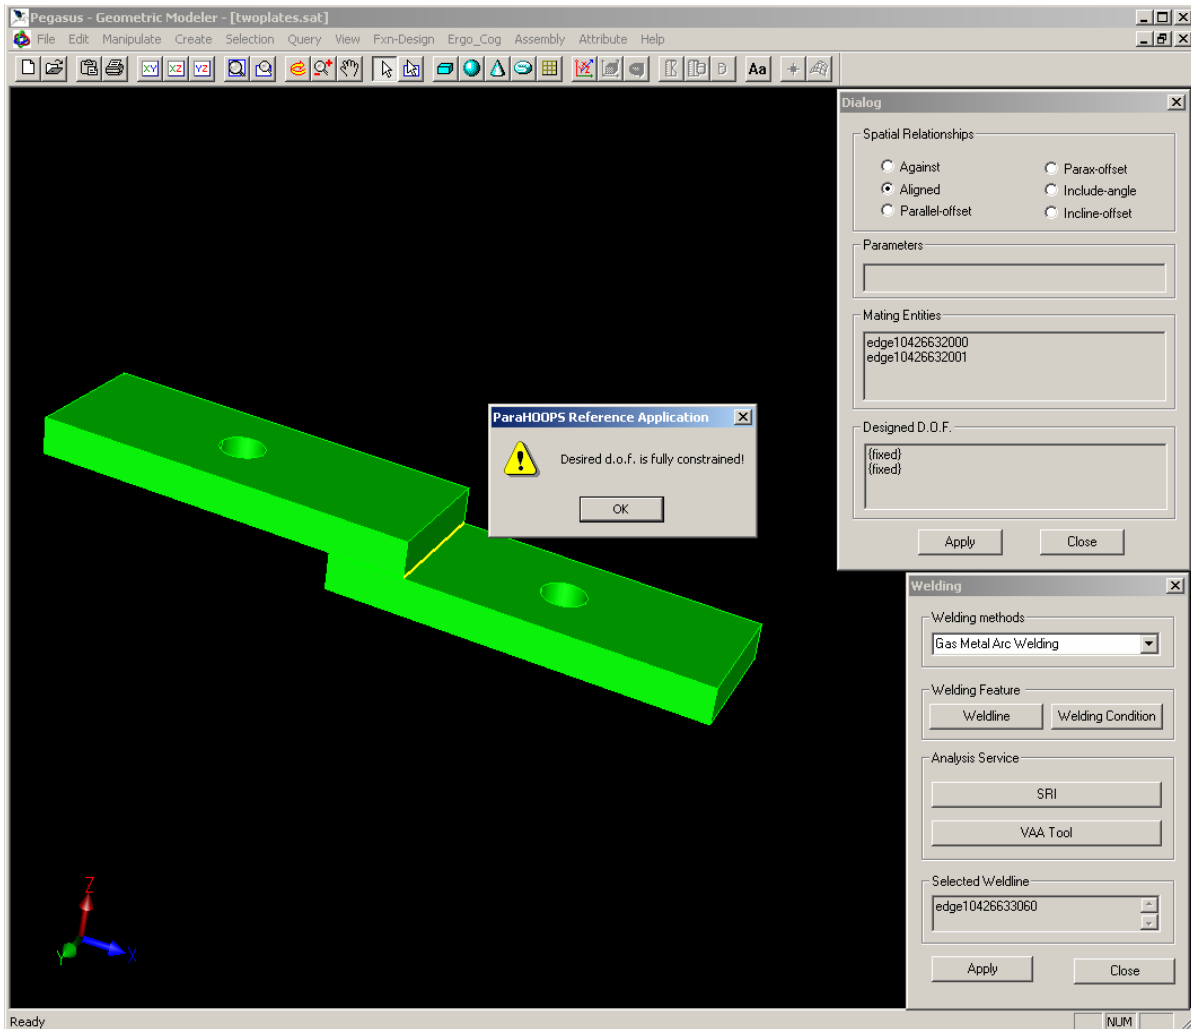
SRI tool indicating SRI of arc welding
